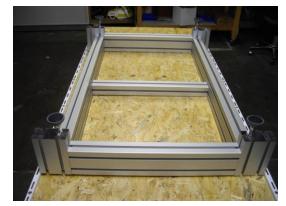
Assembled frame of a CNC-machine of the Pro Line 06-05
